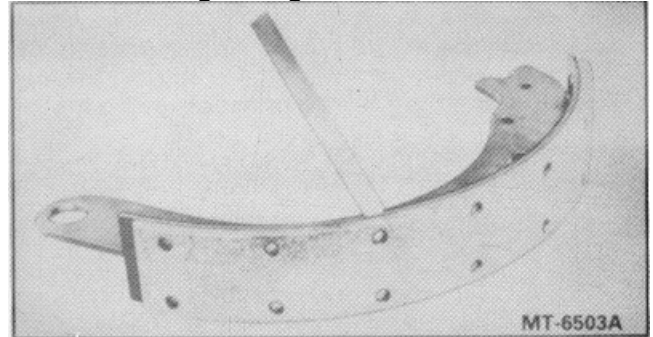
Checking Tightness of Lining Using A Feeler Gauge
